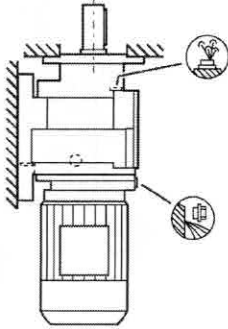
Mounting positions for helical gearbox D/Z foot-mounted design, sizes 39 - 189
